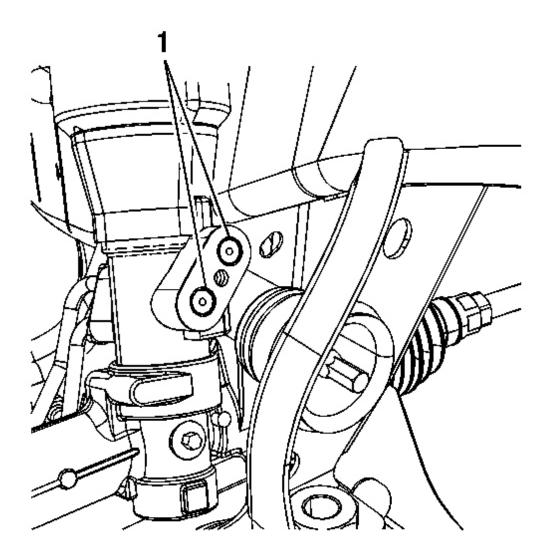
View Of Power Steering Gear Oil Seals Courtesy of GENERAL MOTORS CORP.
